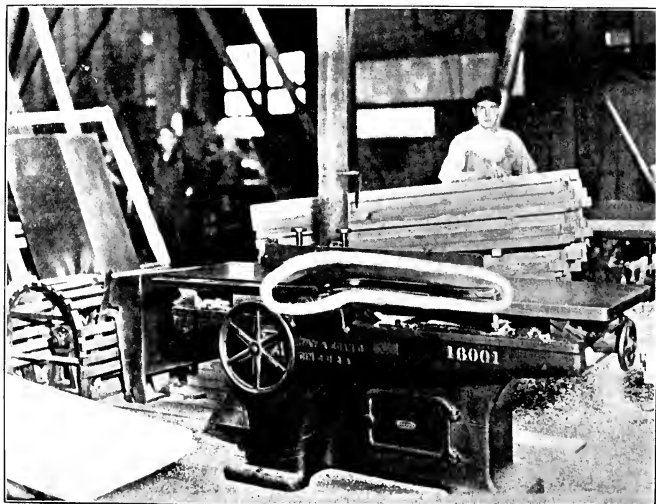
Illustration No. 23. Wood jointer with guard over cutter head. Belt pulley and countershaft inclosed.
